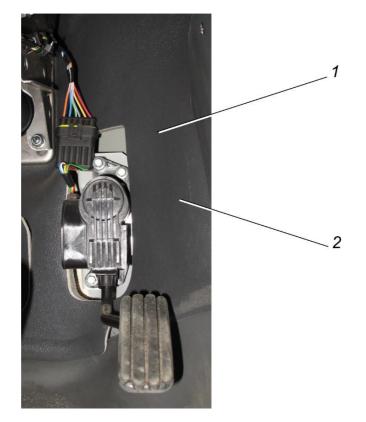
Accelerator pedal module installation: 1 – six-pin connector; 2 – pedal module
